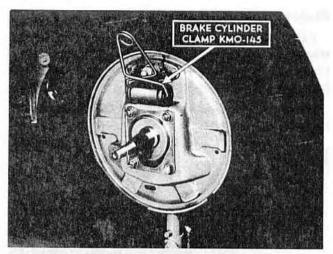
Wheel Cylinder Clamp Holds the Wheel Cylinder Parts in Place
